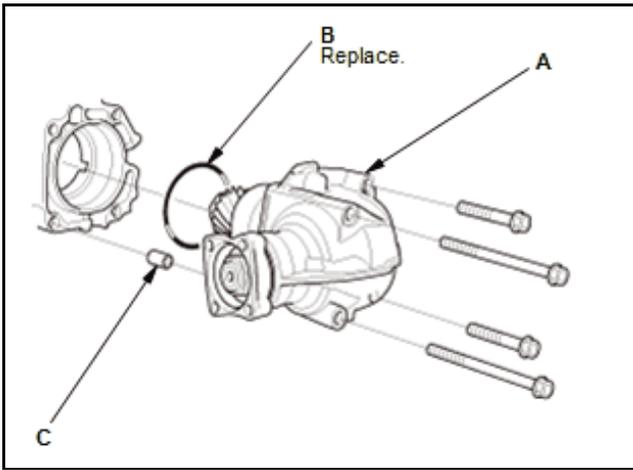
Exploded View Of Transmission (AWD) (2 Of 2)
